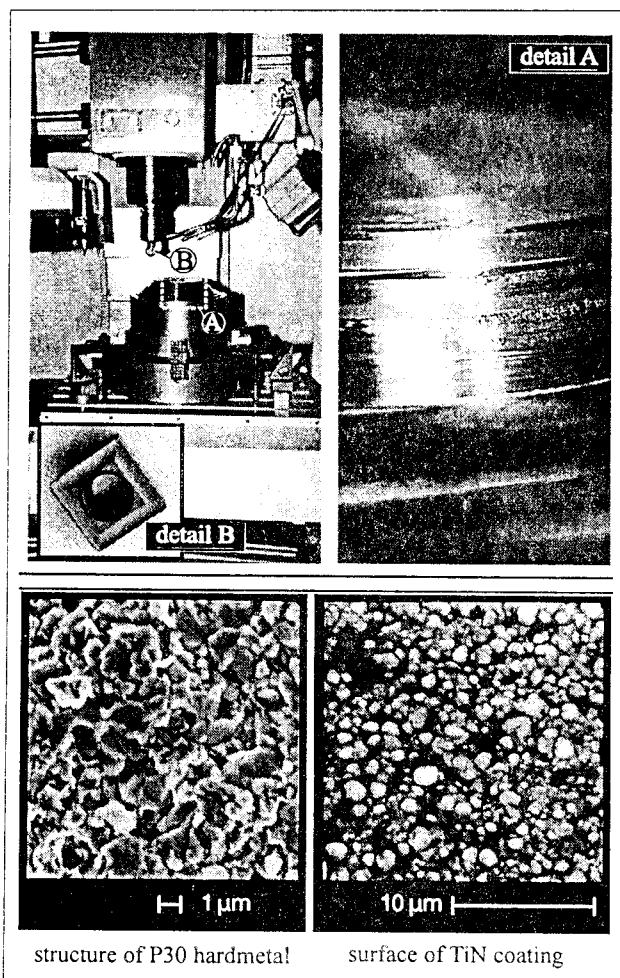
The experimental configuration, the produced workpiece surface and details of the coated insert
